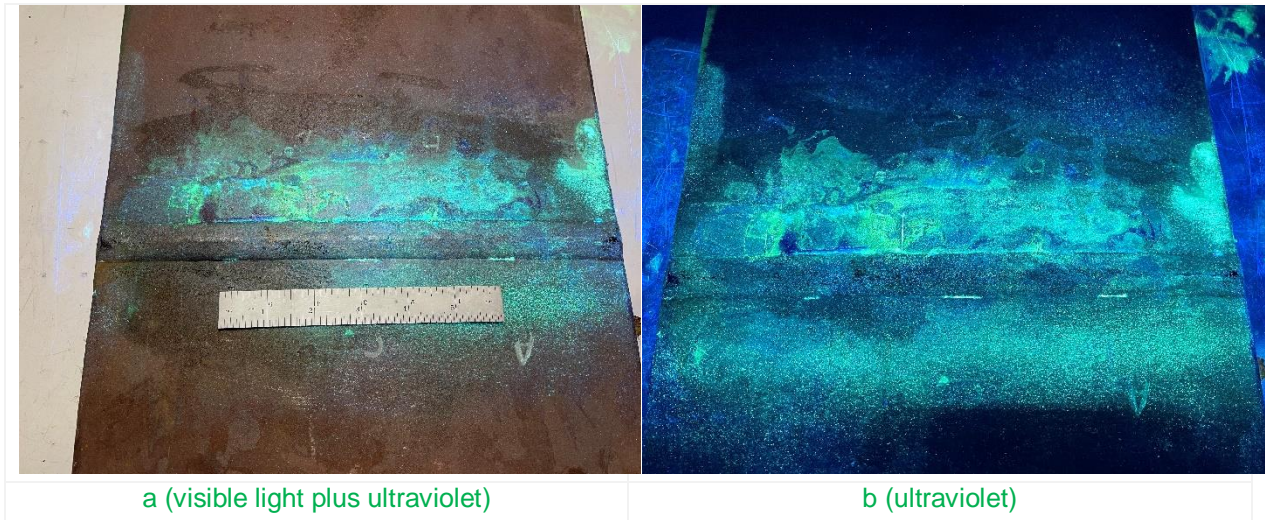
PT indications of the entire weld for specimen TTCI-4 containing EDM notches
